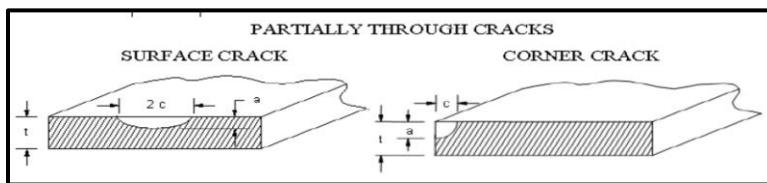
Crack geometry for surface crack and corner crack in fracture mechanics
